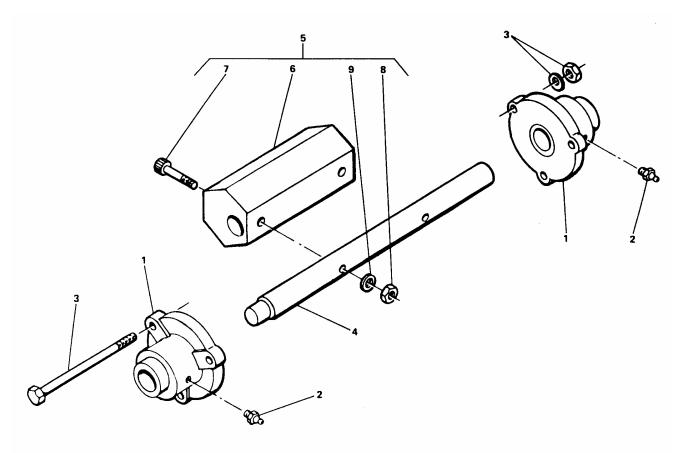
Eccentric Shaft Assembly Models BB2016 and BB1224
